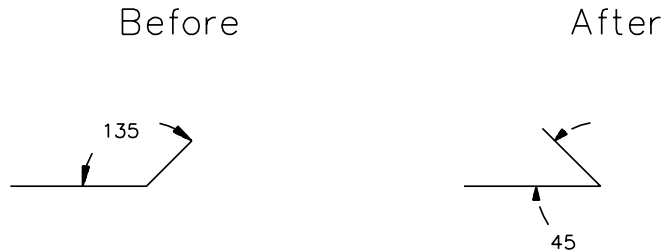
ANGULAR DIMENSION AT VERTEX
